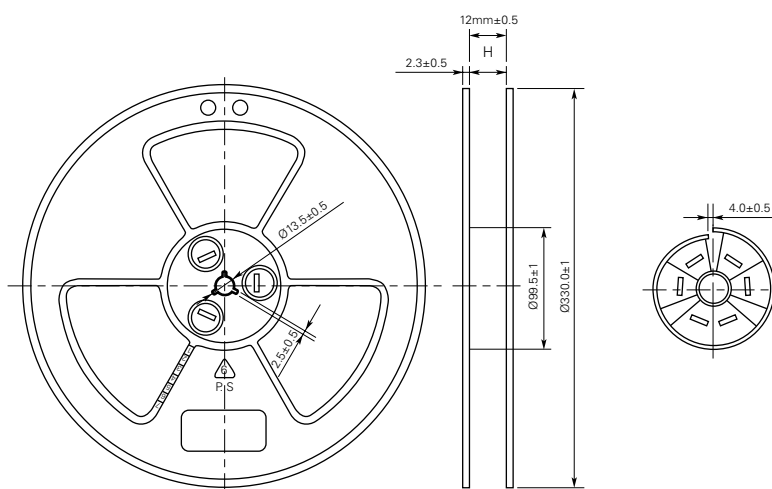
Reel Dimensions for ZENxxxVyyyAzzYC Devices in Millimeters (mm)
